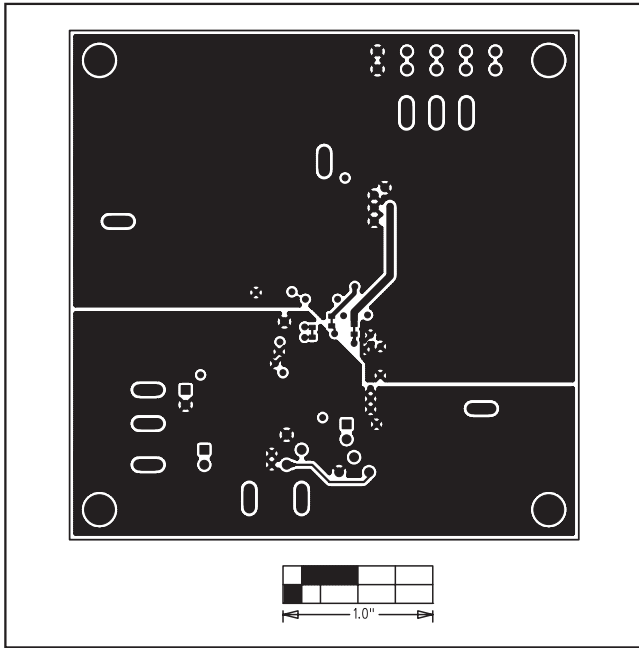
MAX8725 EV Kit PC Board Layout—Solder Side
